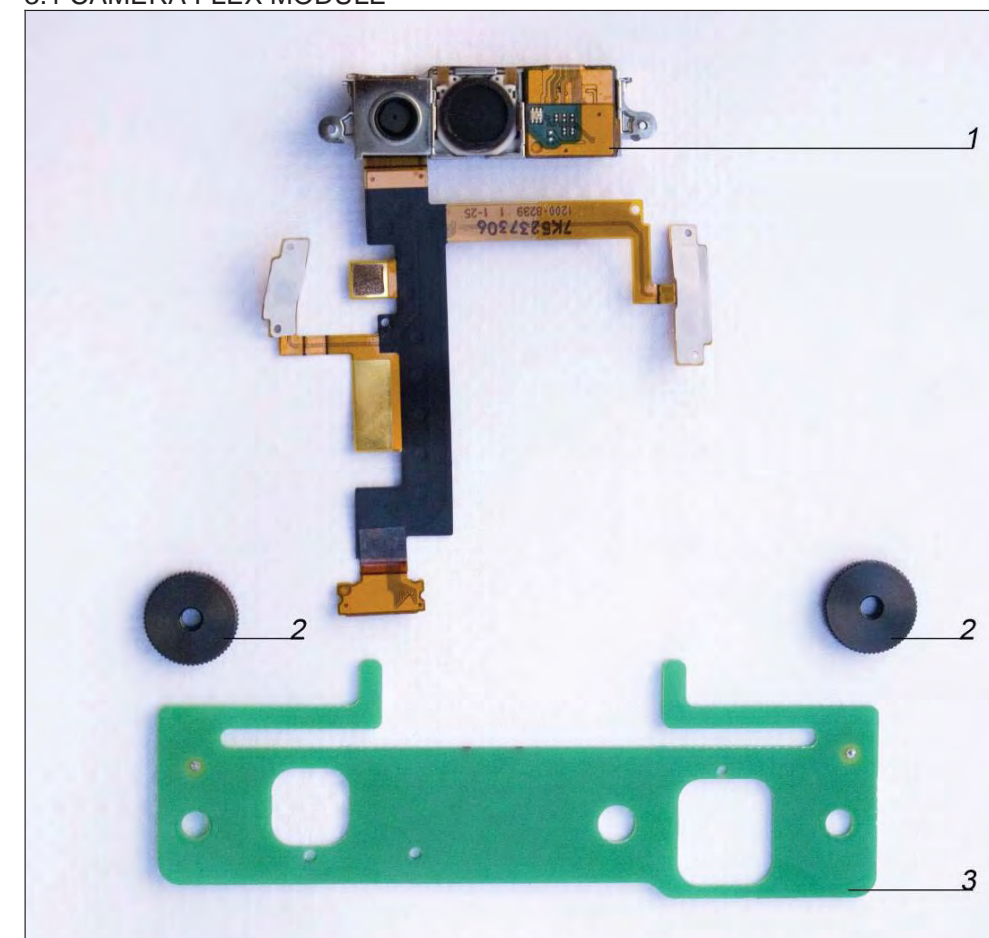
The components used when mounting the camera flex module is 1) camera flex module 2) two flat nuts 3) camera clamping frame.
